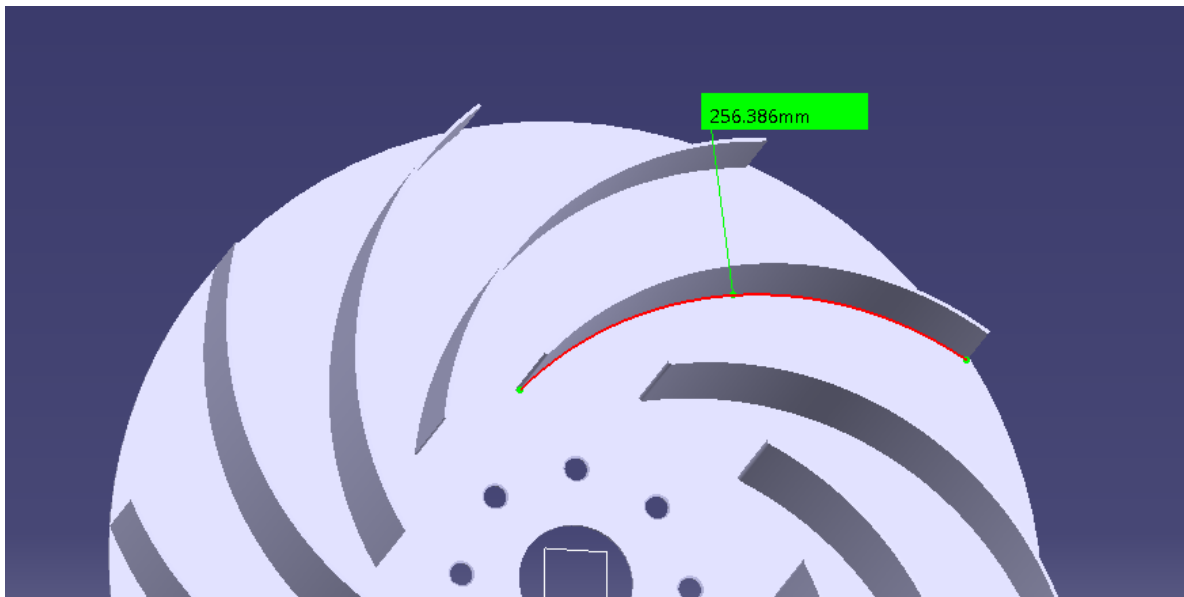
Measurement of the blades arc length in CAD software. This measurement was used for cutting the initial trapezoid steel plate from which the blade will be formed.
